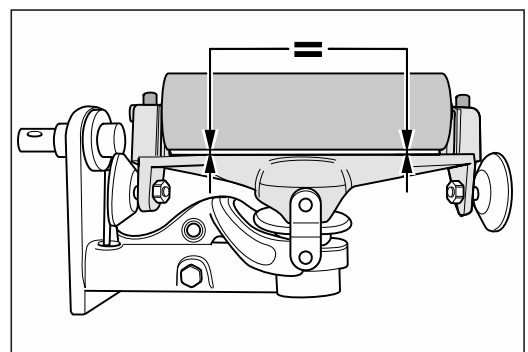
the tensioning roller is positioned parallel to the top of the drive unit.
